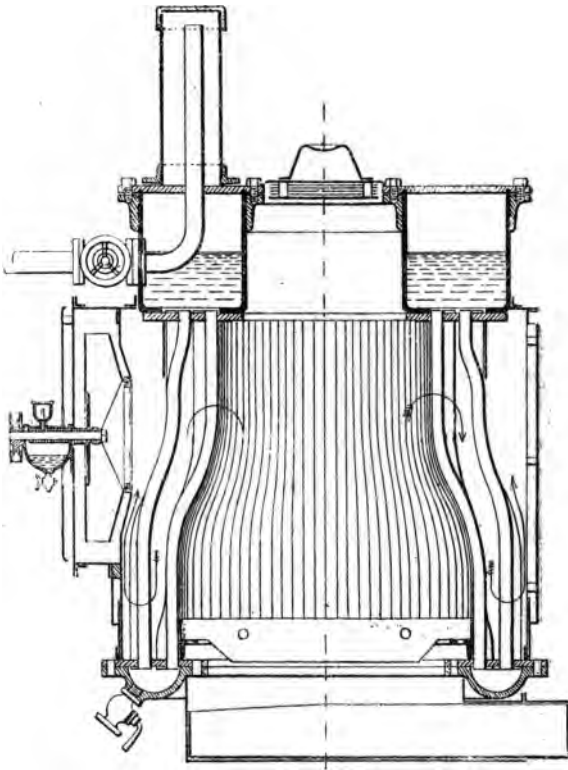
THORNYCROFT GENERATOR : SECTIONAL ELEVATION.
